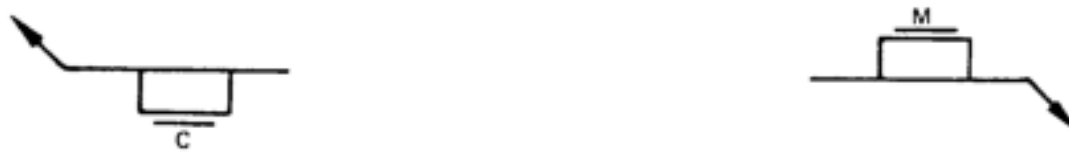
Surface contour of plug welds and slot welds with user's standard finish symbol.
